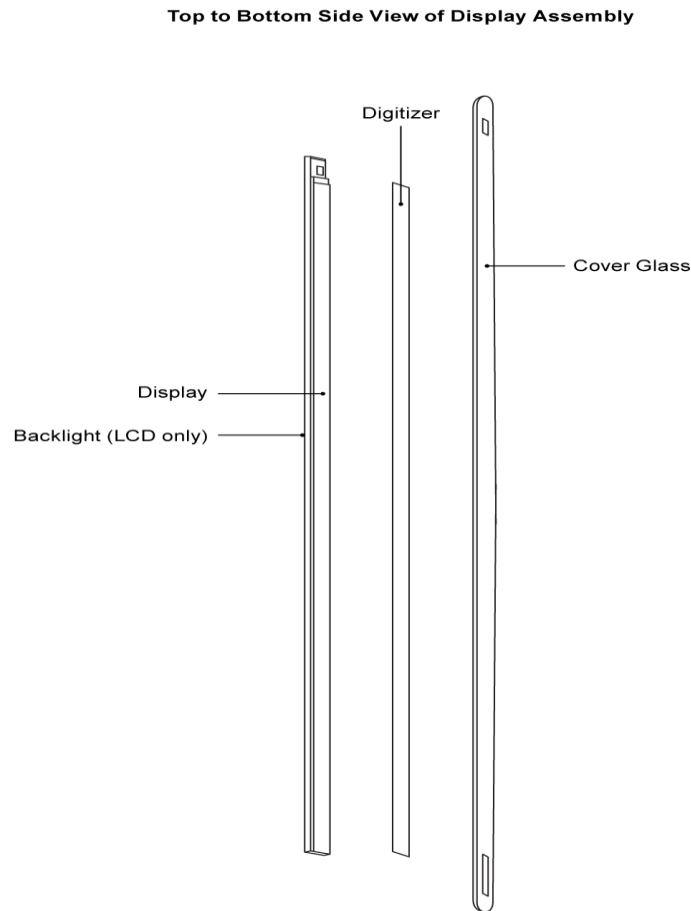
Top to Bottom Side View of Display Assembly
